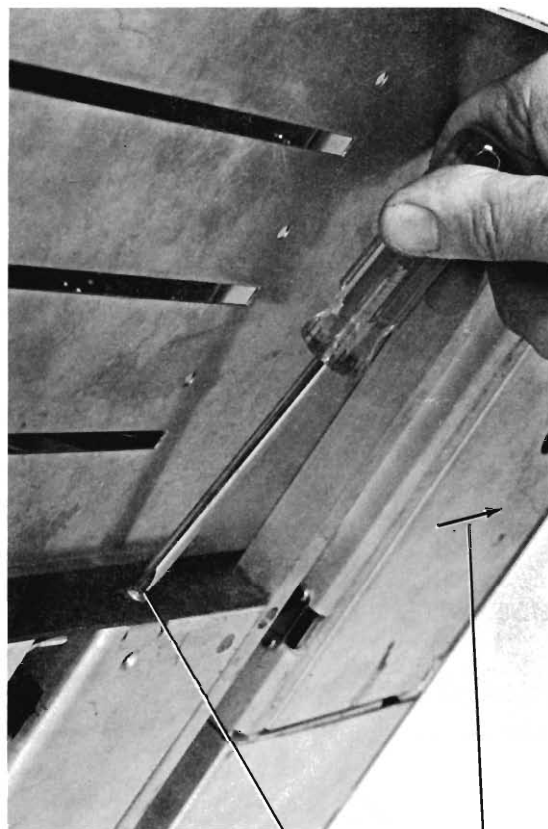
Drive Roller and Table Link Removal (Part 2)
